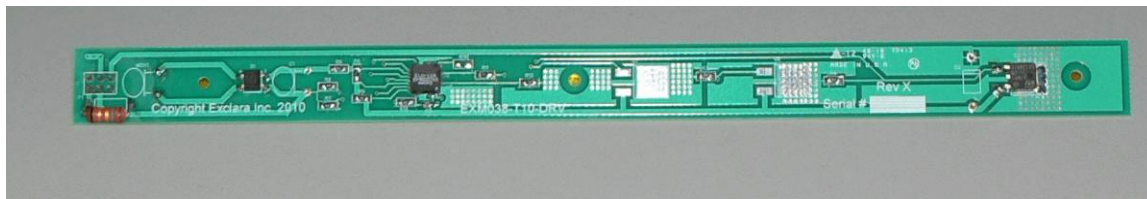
EXM038 T10-DRV Driver Board Reference Design Example
